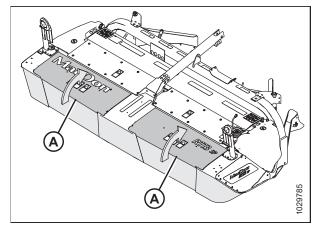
R113 SP Cutterbar Doors Shown, R116 SP Similar
